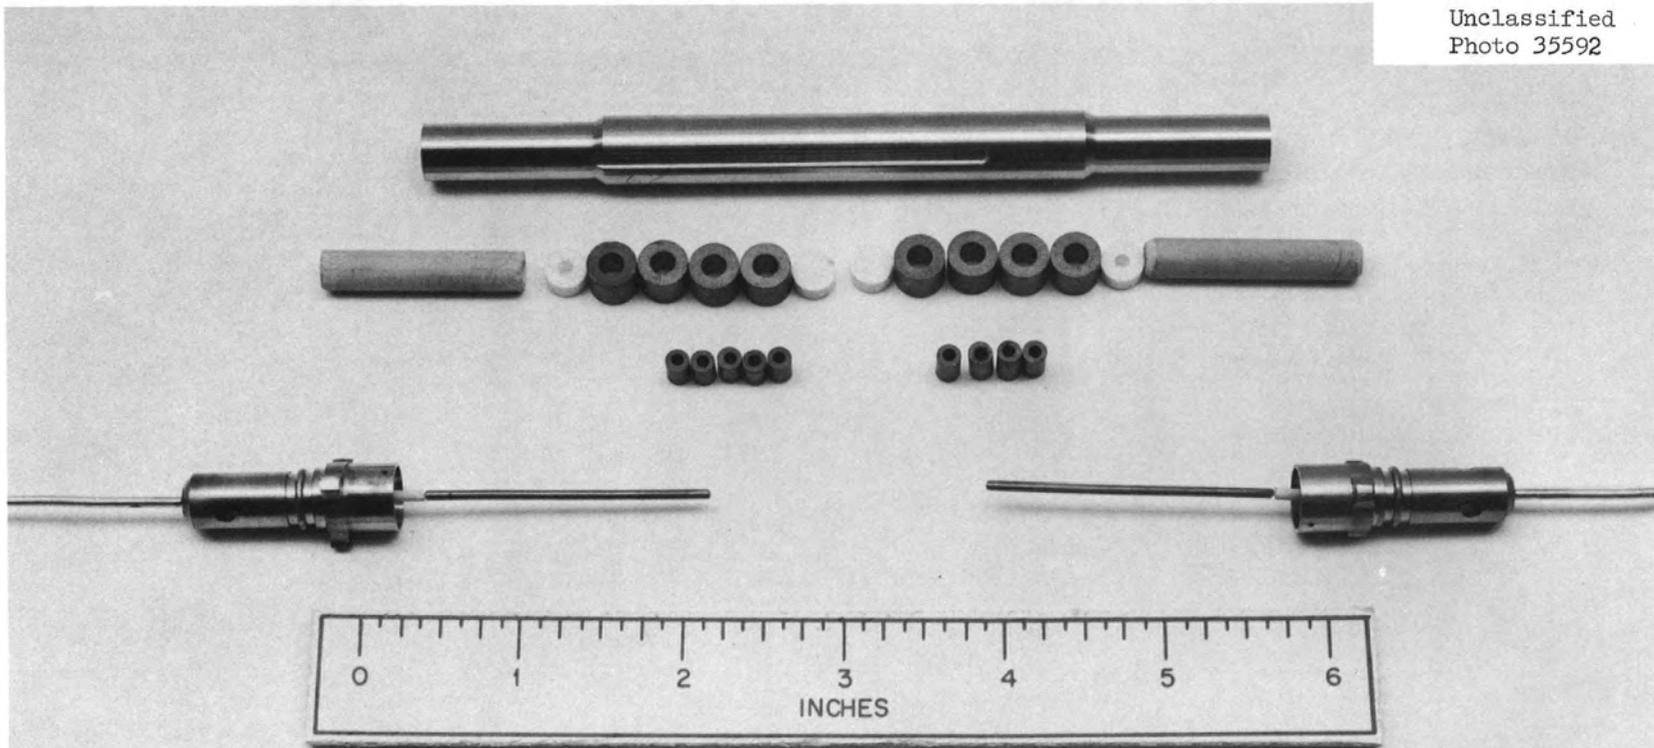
LITR Capsule Parts Prior to Assembly. Thermocouples, hollow cylindrical fuel pellets, ceramic insulators, and the capsule container, respectively, are shown from bottom to top.
